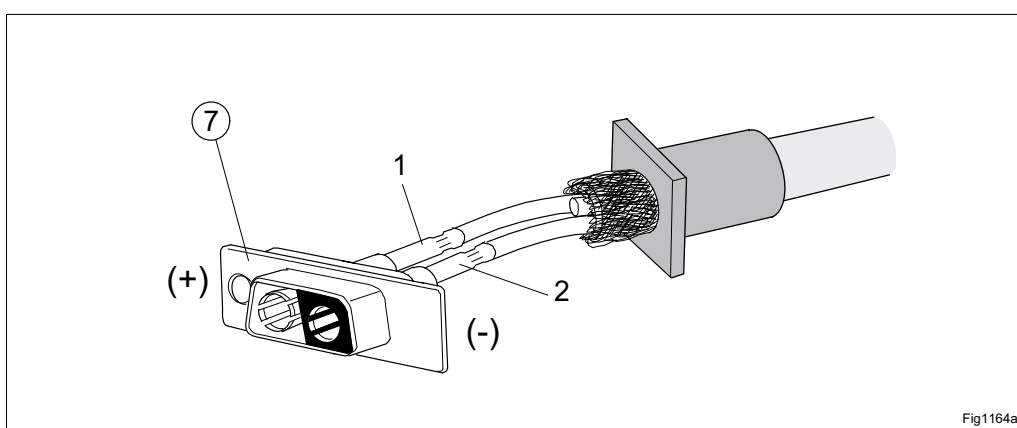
Checking the inspection hole and sliding on the second sleeve.
